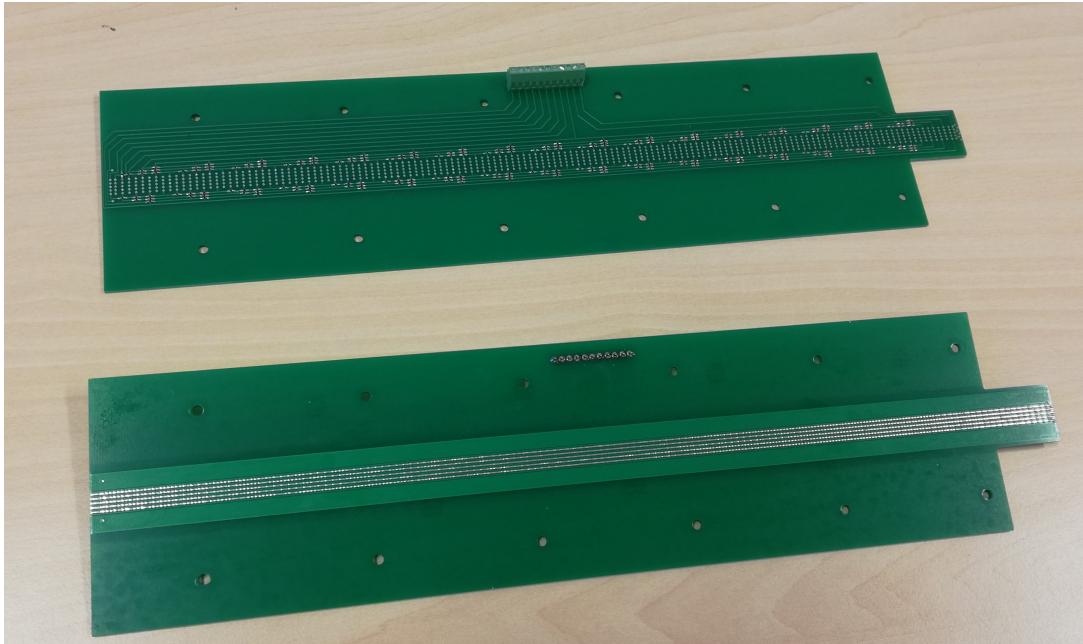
Picture of the front and backside of the PCB. The top plate (front) shows the 205 0-Ohm resistors that have been soldered to the PCB manually, as well as the screw connector. The bottom plate (backside) contains all the necessary electrodes and is the side the ion beam is facing.
